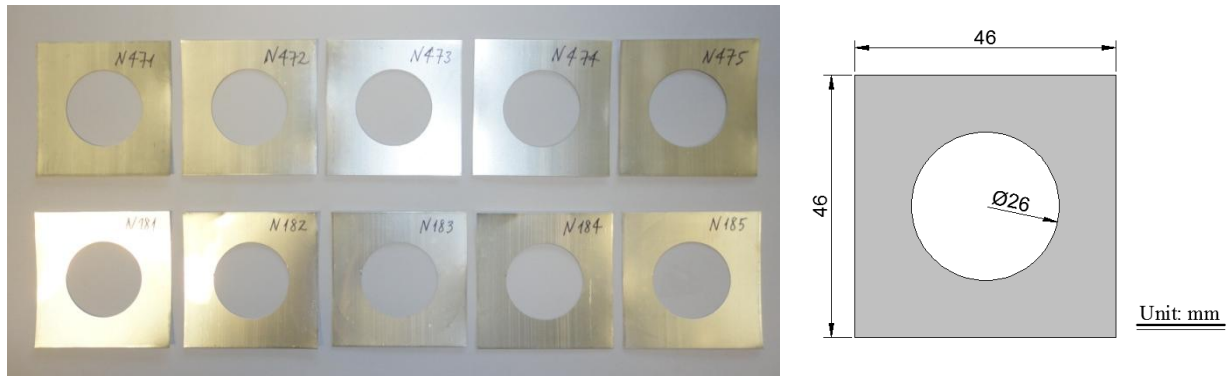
The photo (left) of the ten pieces of YBCO plate and their dimensions (right).
